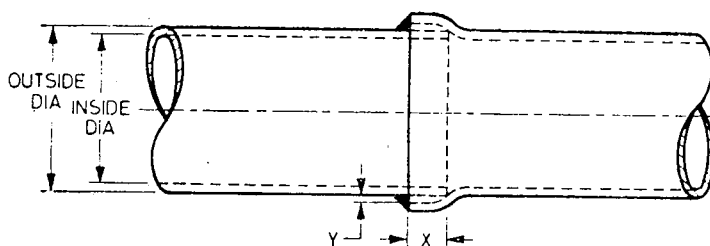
SLEEVE JOINT OR SWELLED AND PLAIN END FOR WELDING
